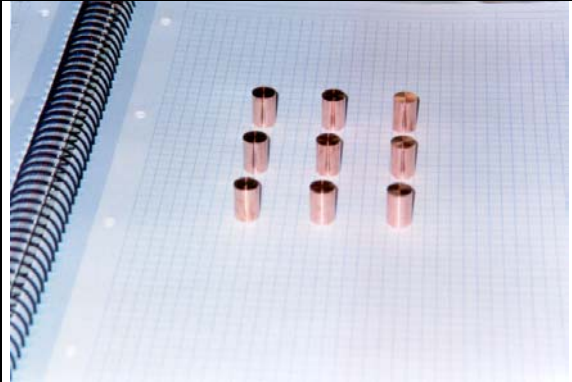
As machined copper test cylinders measuring 10mm  $\varnothing$  and 15mm height.
